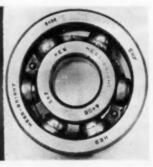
Smearing shown on this bearing roller was caused by too thick an oil.
